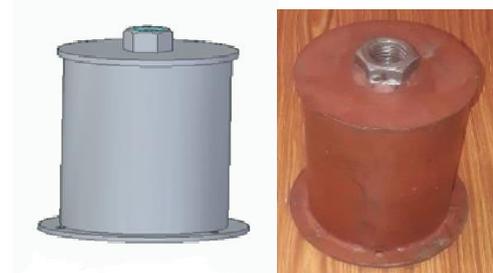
Enclosure head of Compression Cum Extruder Die Type Equipment
